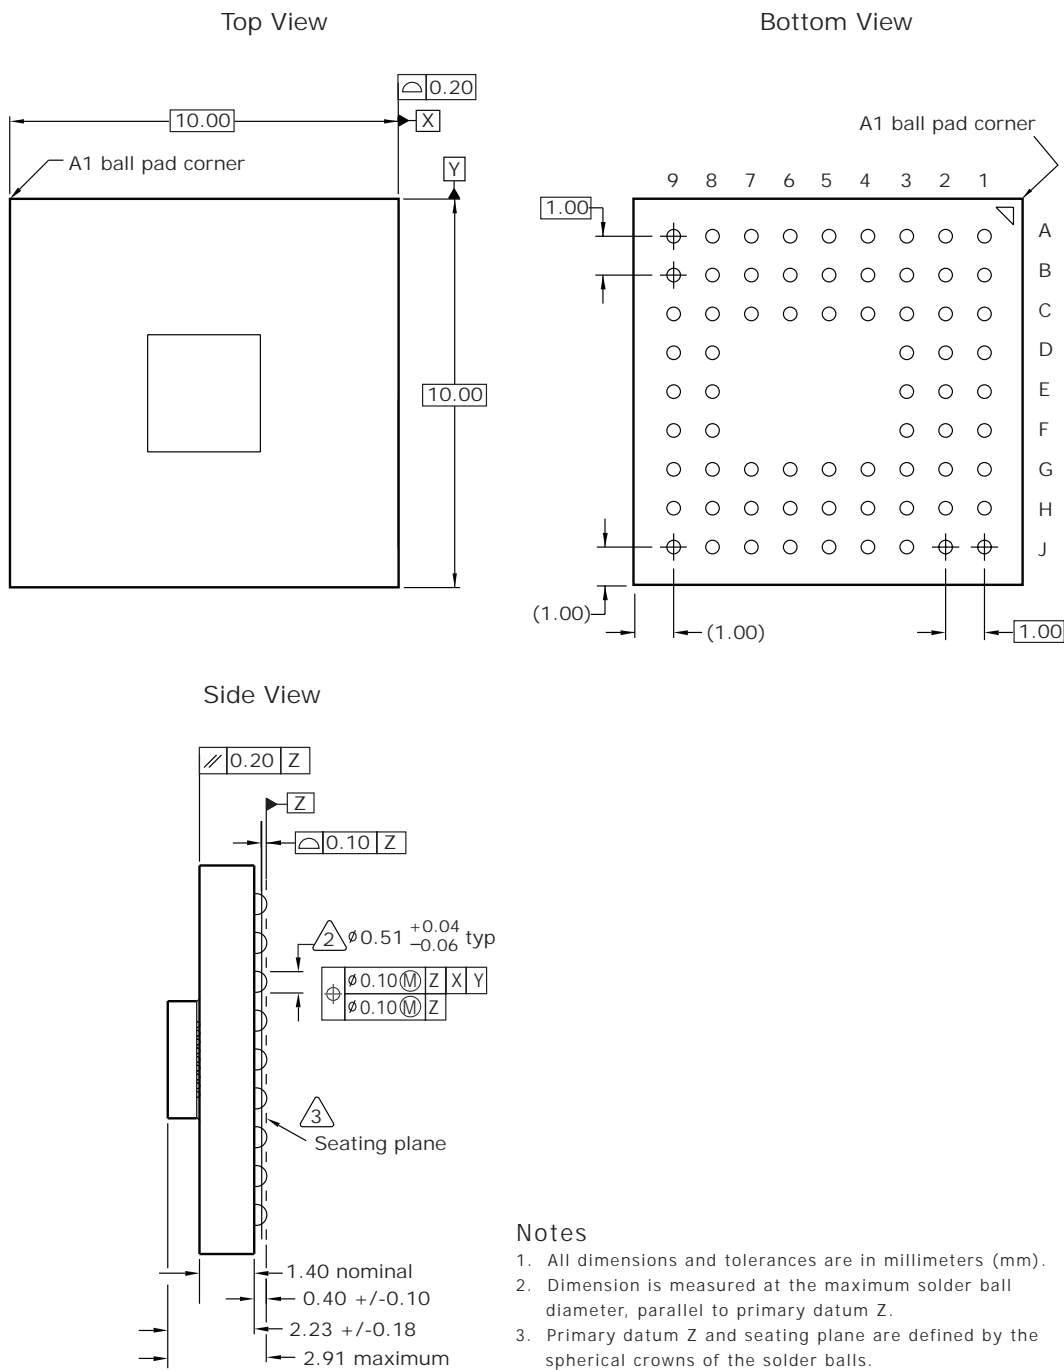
Package Drawing for the 69-Pin CBGA (SX and XSX)
